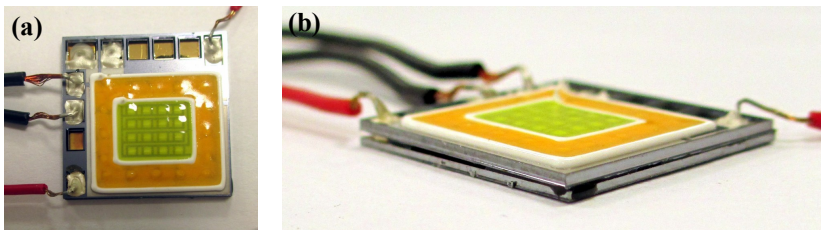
Fully assembled module with external I/O connections: (a) top view; (b) side view.
